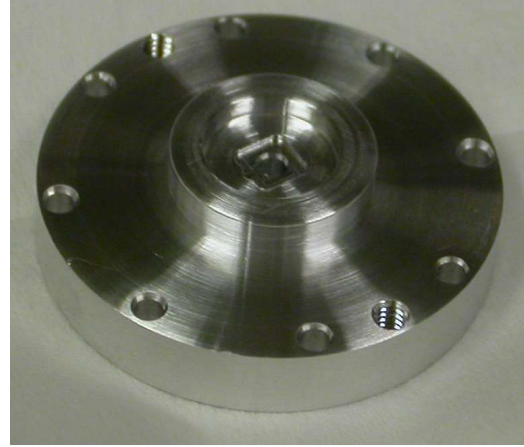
Disposable chip-holder. The square milled slot in the center is where the 3 mm square chip is placed and glued in place with 2850FT (black) Stycast. The lower surface is where the indium seal sits and is finely polished. Bolt holes (8X) for indium seal screws and jacking screw threads (2X) can be seen.
